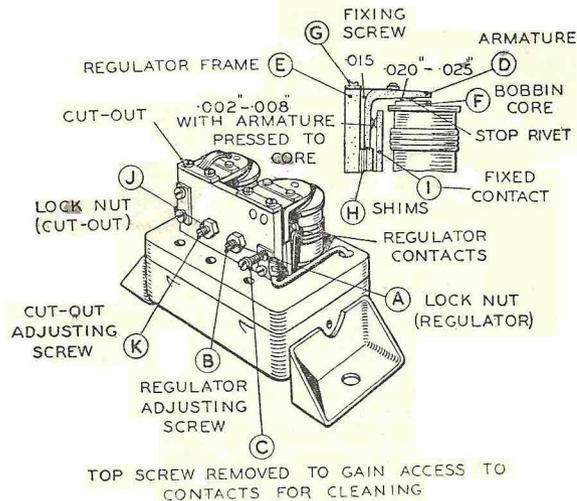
Regulator and Cut-out Adjustment and Setting.
